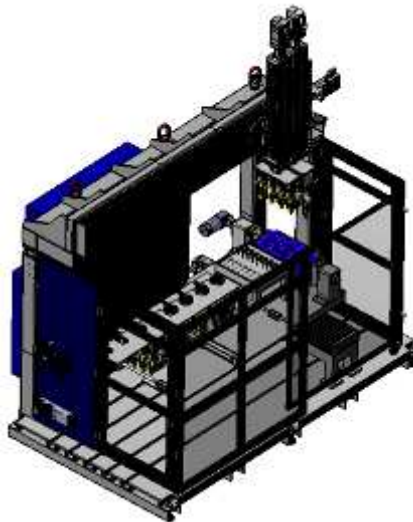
SmartCellComau – parallel production flow assembly module
